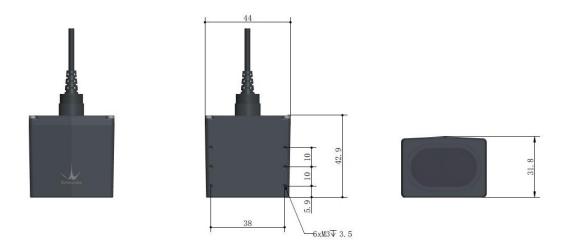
TF03-180 dimensions (Left 1: top view; Left 2: upward view; Left 3: front view) Unit: mm
